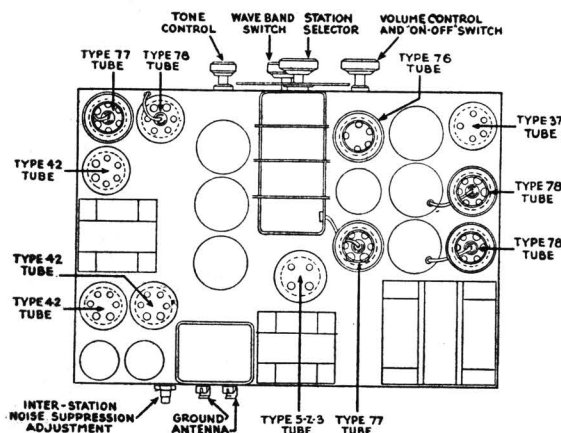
Top View of Chassis, Showing Tube Locations and Major Parts
